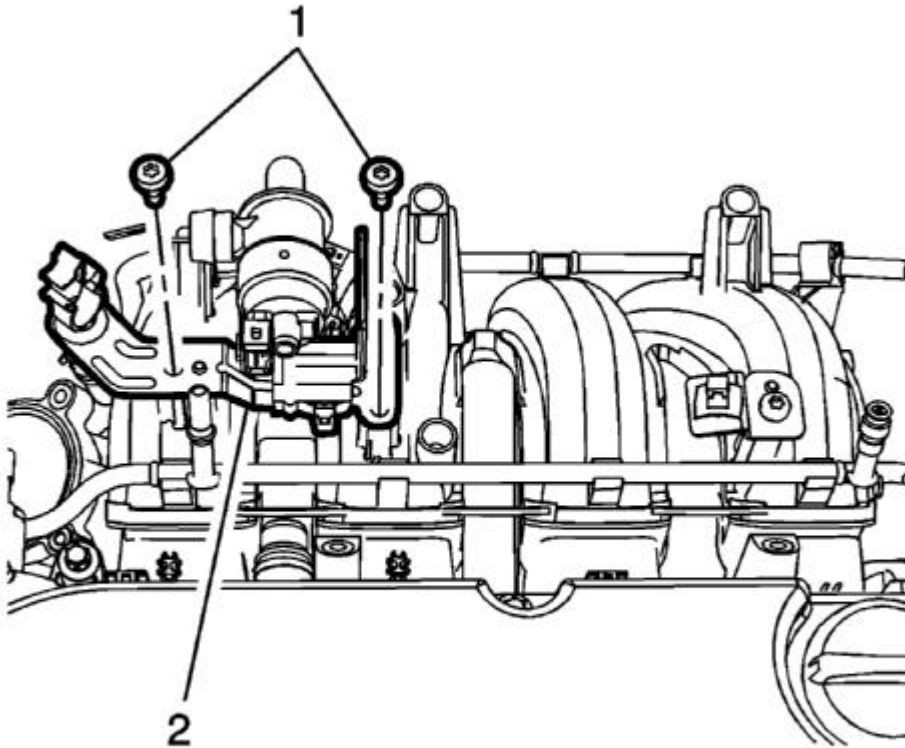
Evaporative Emission Canister Purge Solenoid Valve Bracket & Bolts
